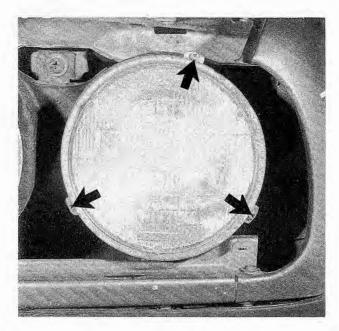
Sealed beam headlight and retaining ring screws (arrows).
